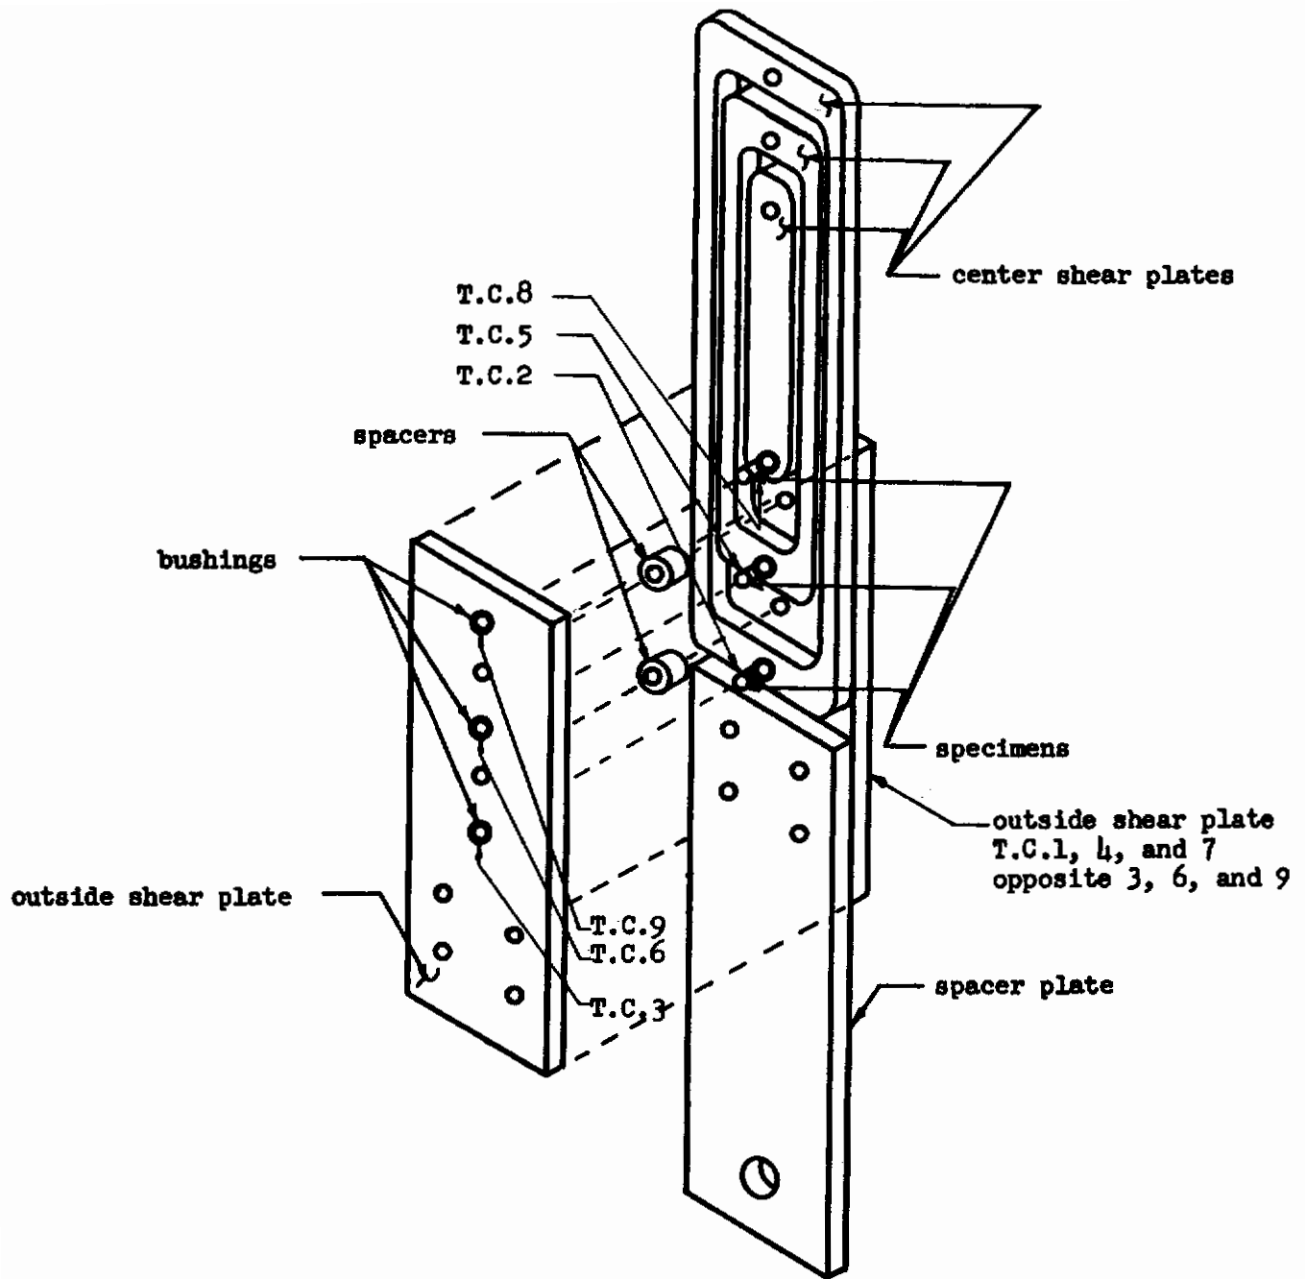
DOUBLE SHEAR TEST FIXTURE
